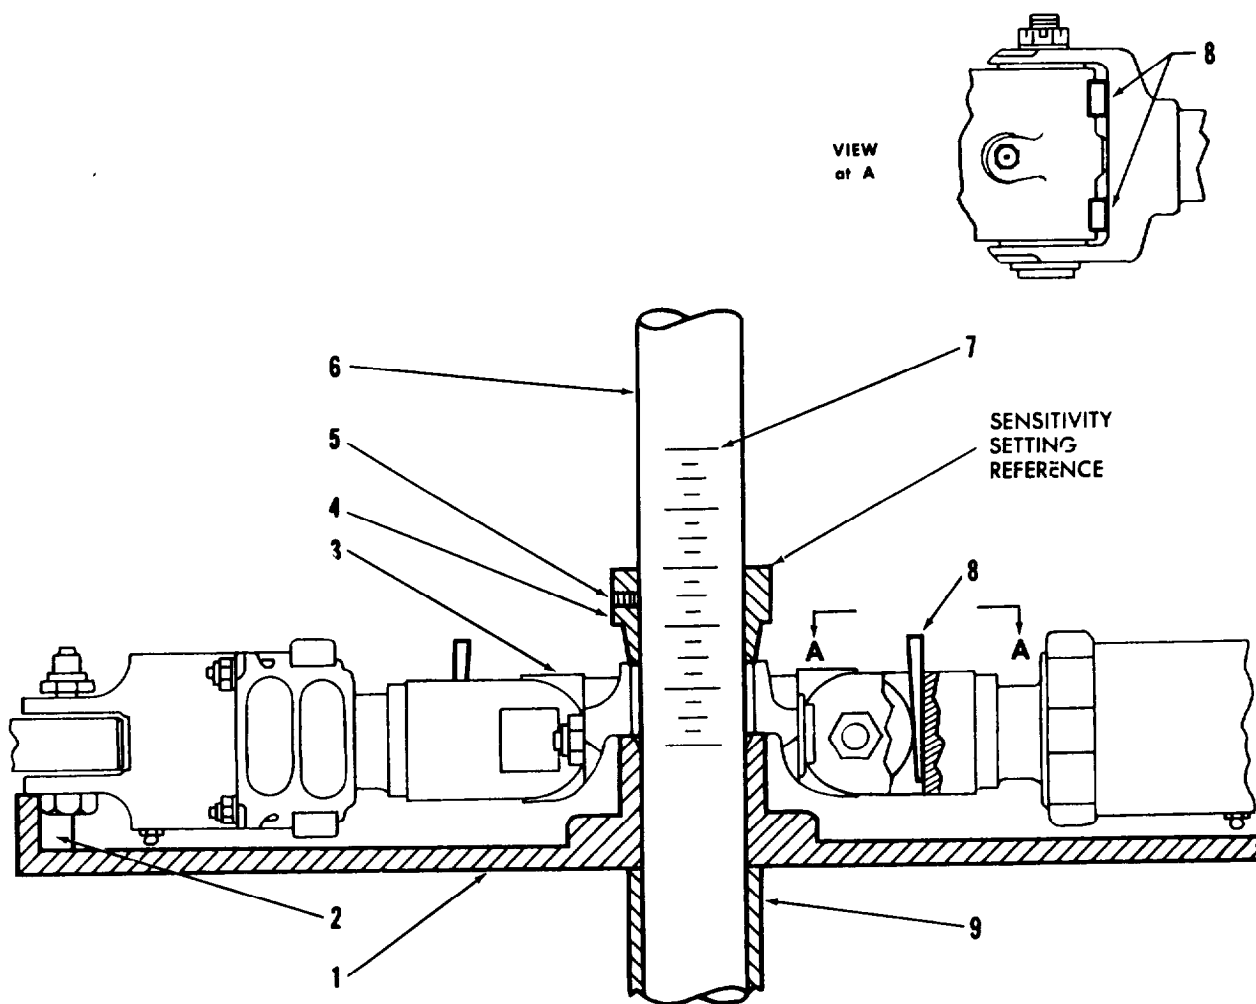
Balancer Installation - CH-34 Helicopter Tail Rotor Hub and Blade Assembly.
